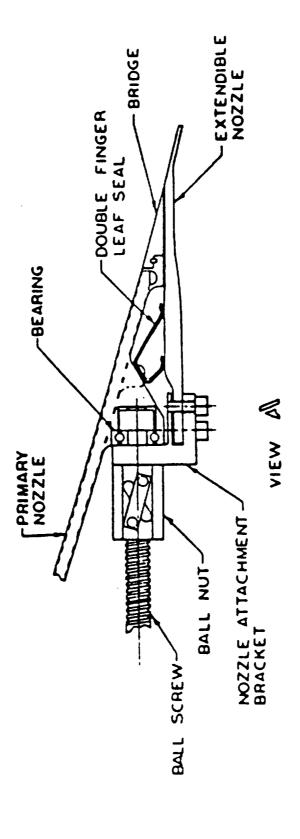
OTV Engine Extendible Nozzle Interface and Attachment Design Concept
